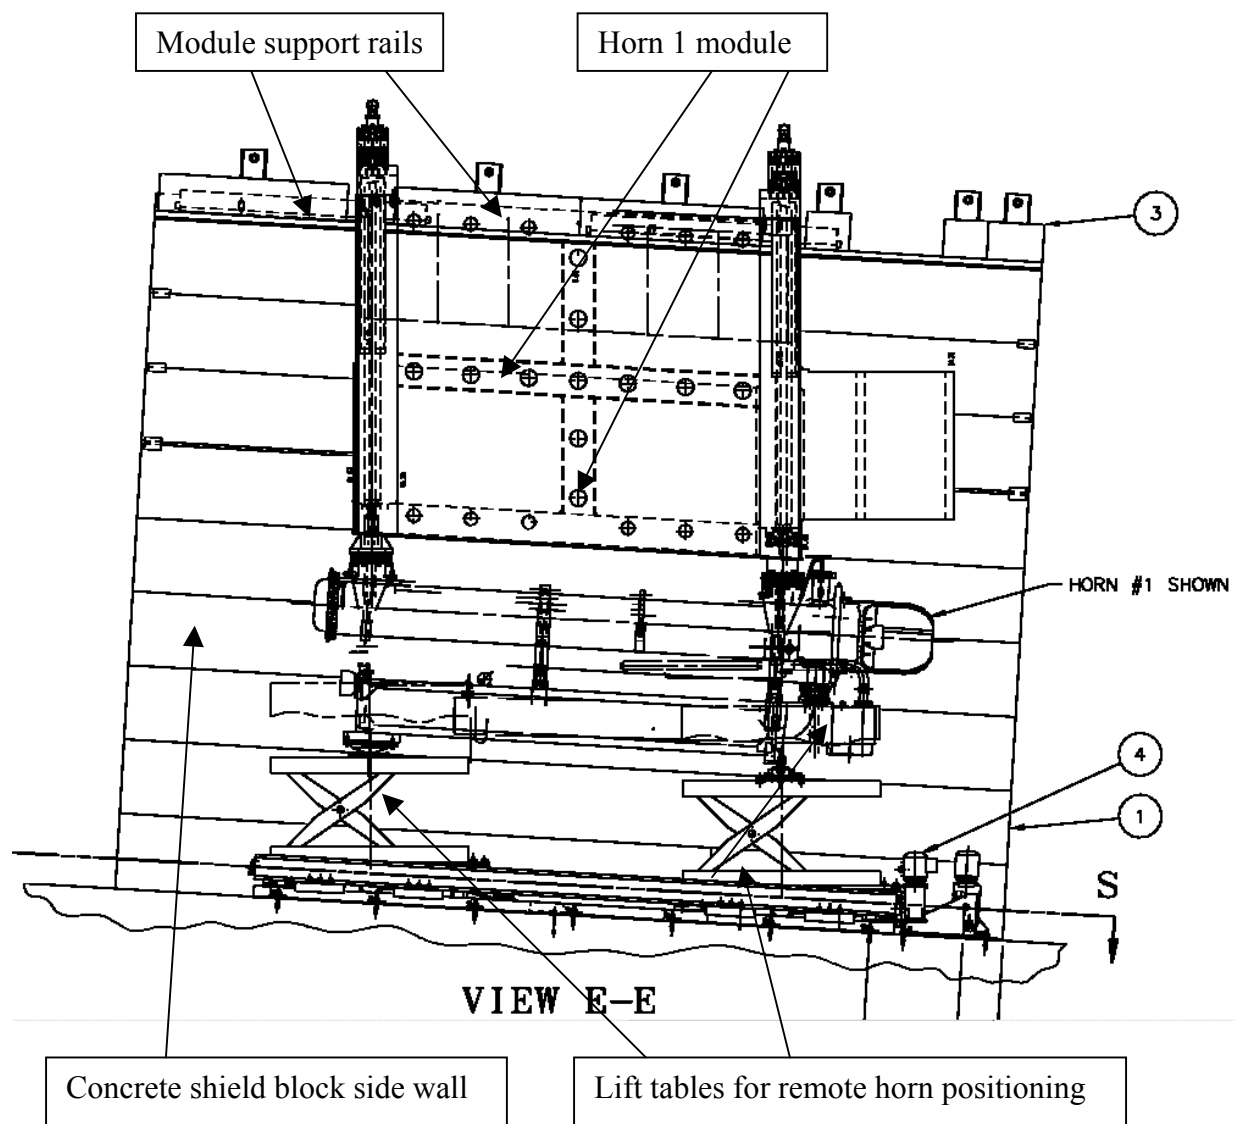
Side elevation view of the Hot Cell assembly with Horn 1 module installed.
